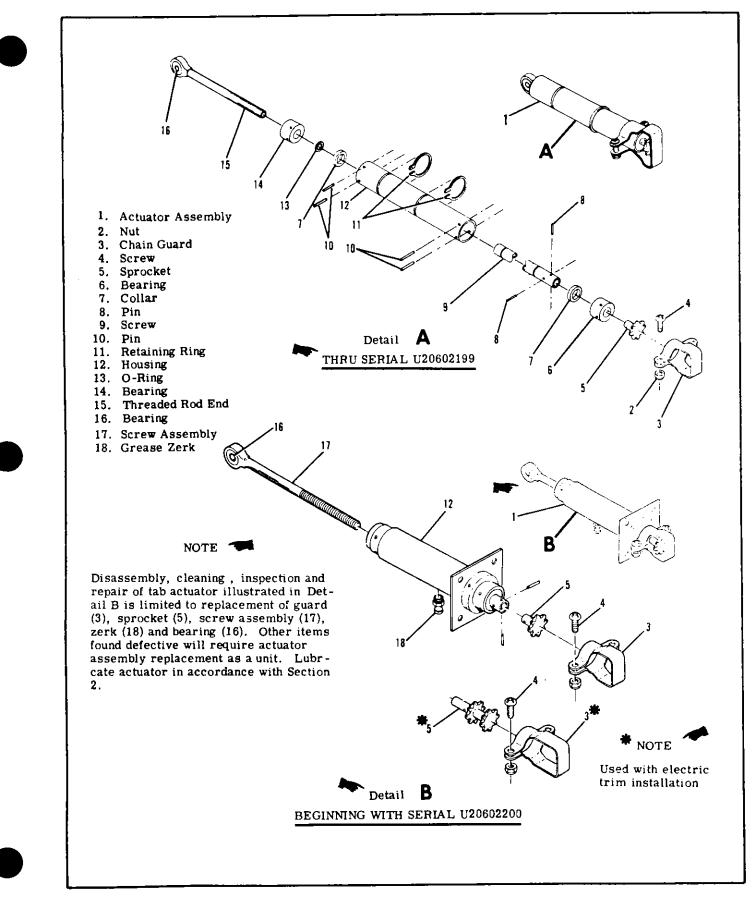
A. Elevator Trim Tab Actuator Assembly
